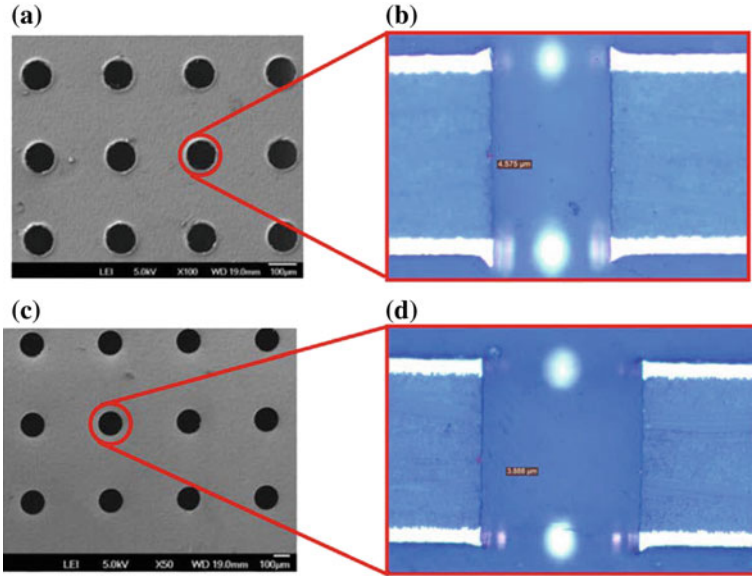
Holes fabricated by a 0.1- and b 0.15-mm drill bites c enlarged view of microhole (0.1 mm drill) d enlarged view of microhole (0.15 mm drill) [26] (with kind permission from 'Emerald Group Publishing Limited')
